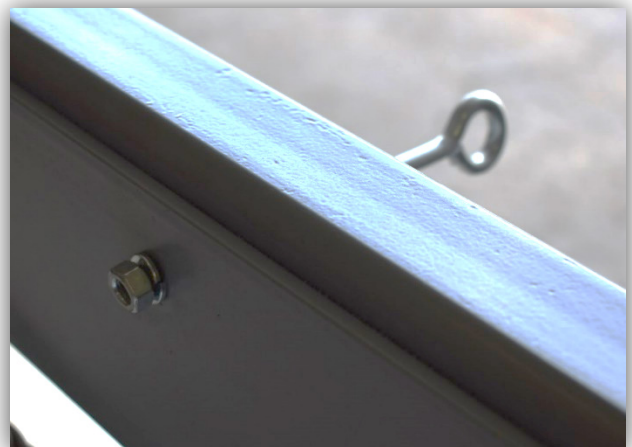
Eyebolt Nut and Washer, Inside the Crossmember
